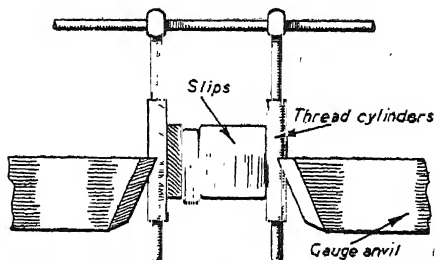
Alternative method of setting or checking the thread caliper gauge.
